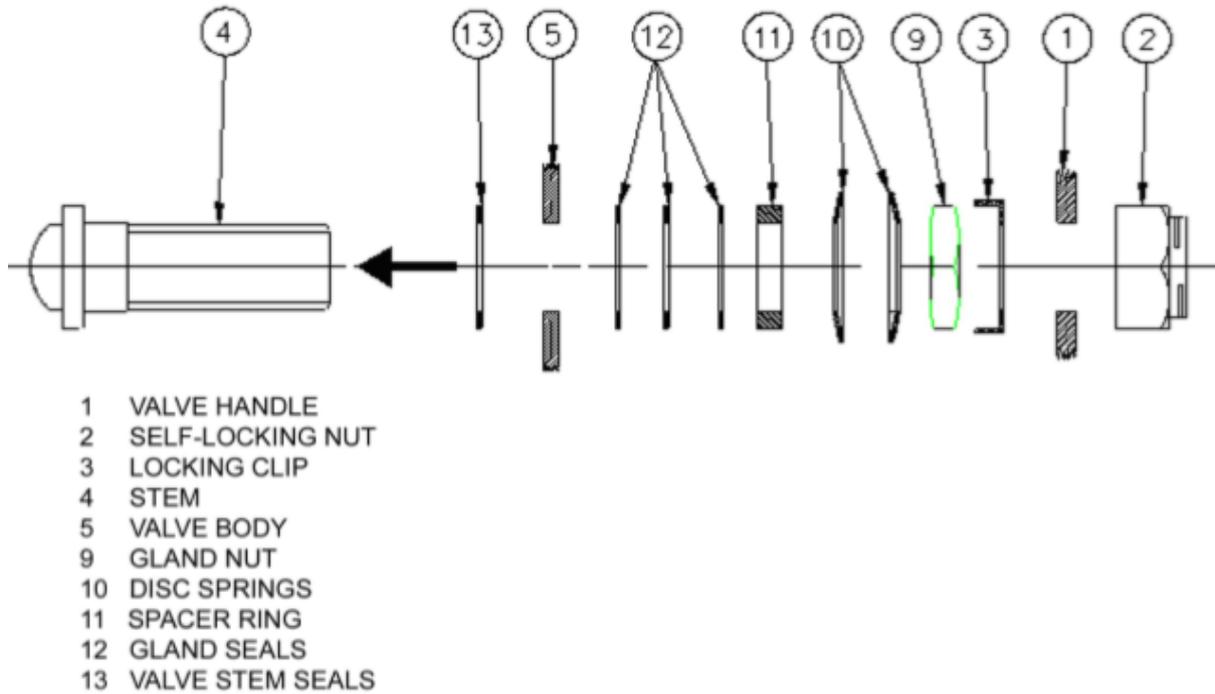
PART VIEW SHOWING CROSSFLOW ASSEMBLY
